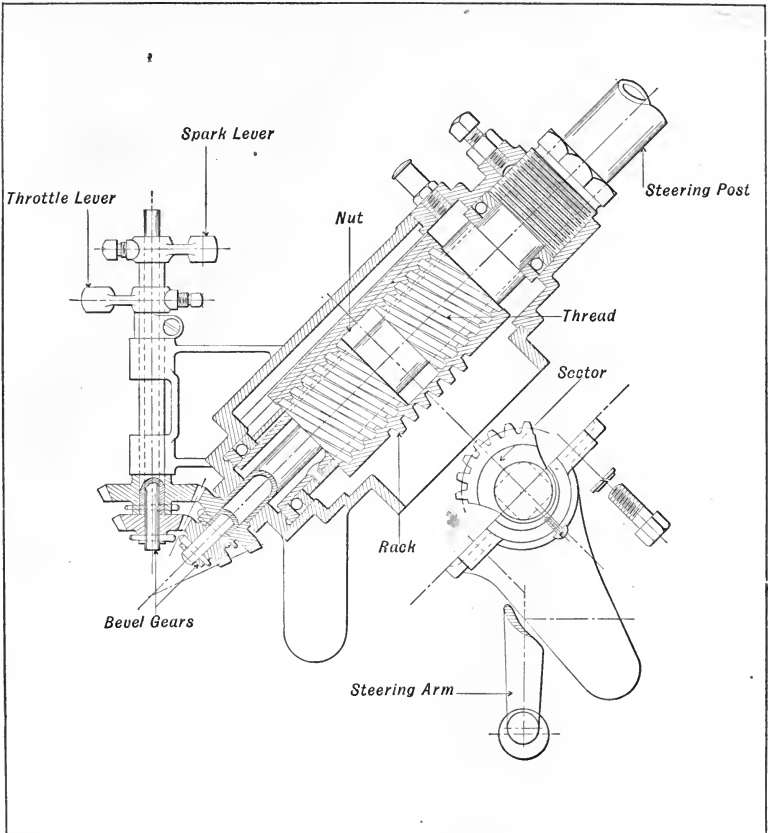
Unconventional Steering Gear Employing Threaded Steering Post and Movable Nut with Rack to Engage Sector on Steering Arm Shaft.
